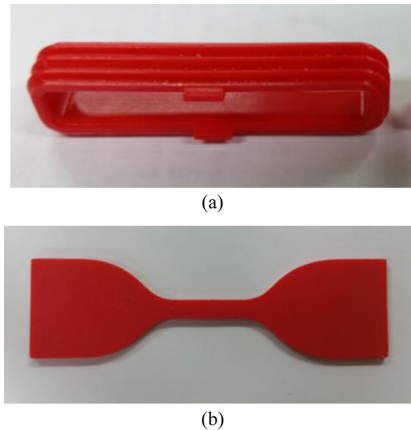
(a) Rubber seal sample specimen and (b) standard tensile rubber specimen.
